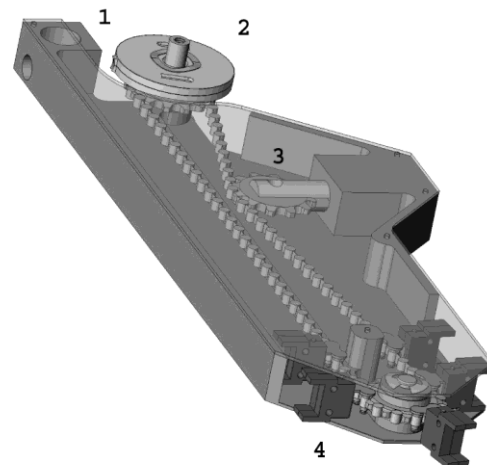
Cut-Away view of extractor foil-drive assembly showing: 1. Swivel joint for attachment to ram assembly. 2. Worm drive and sprocket. 3. Drive-chain tensioner. 4. Graphite foil-holder blocks mounted on modified chain links.
